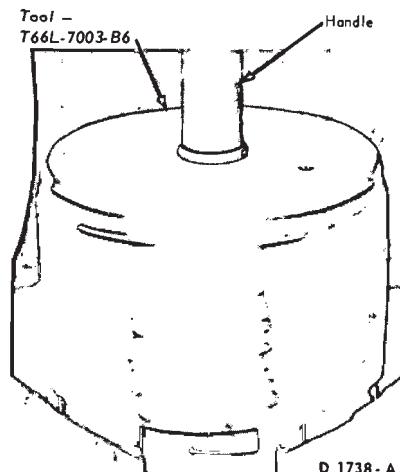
Installing Low and Reverse Brake Drum Bushing
